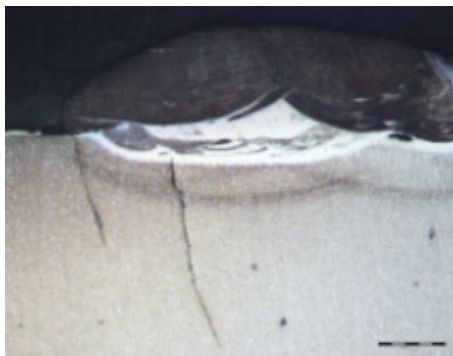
cracks in HAZ of 1.2436 steel weldment in GTAW process.
